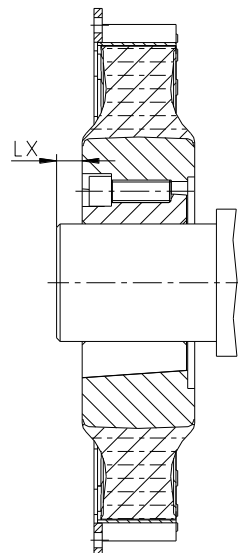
Mounting position of taper clamping sleeve to the shaft end
